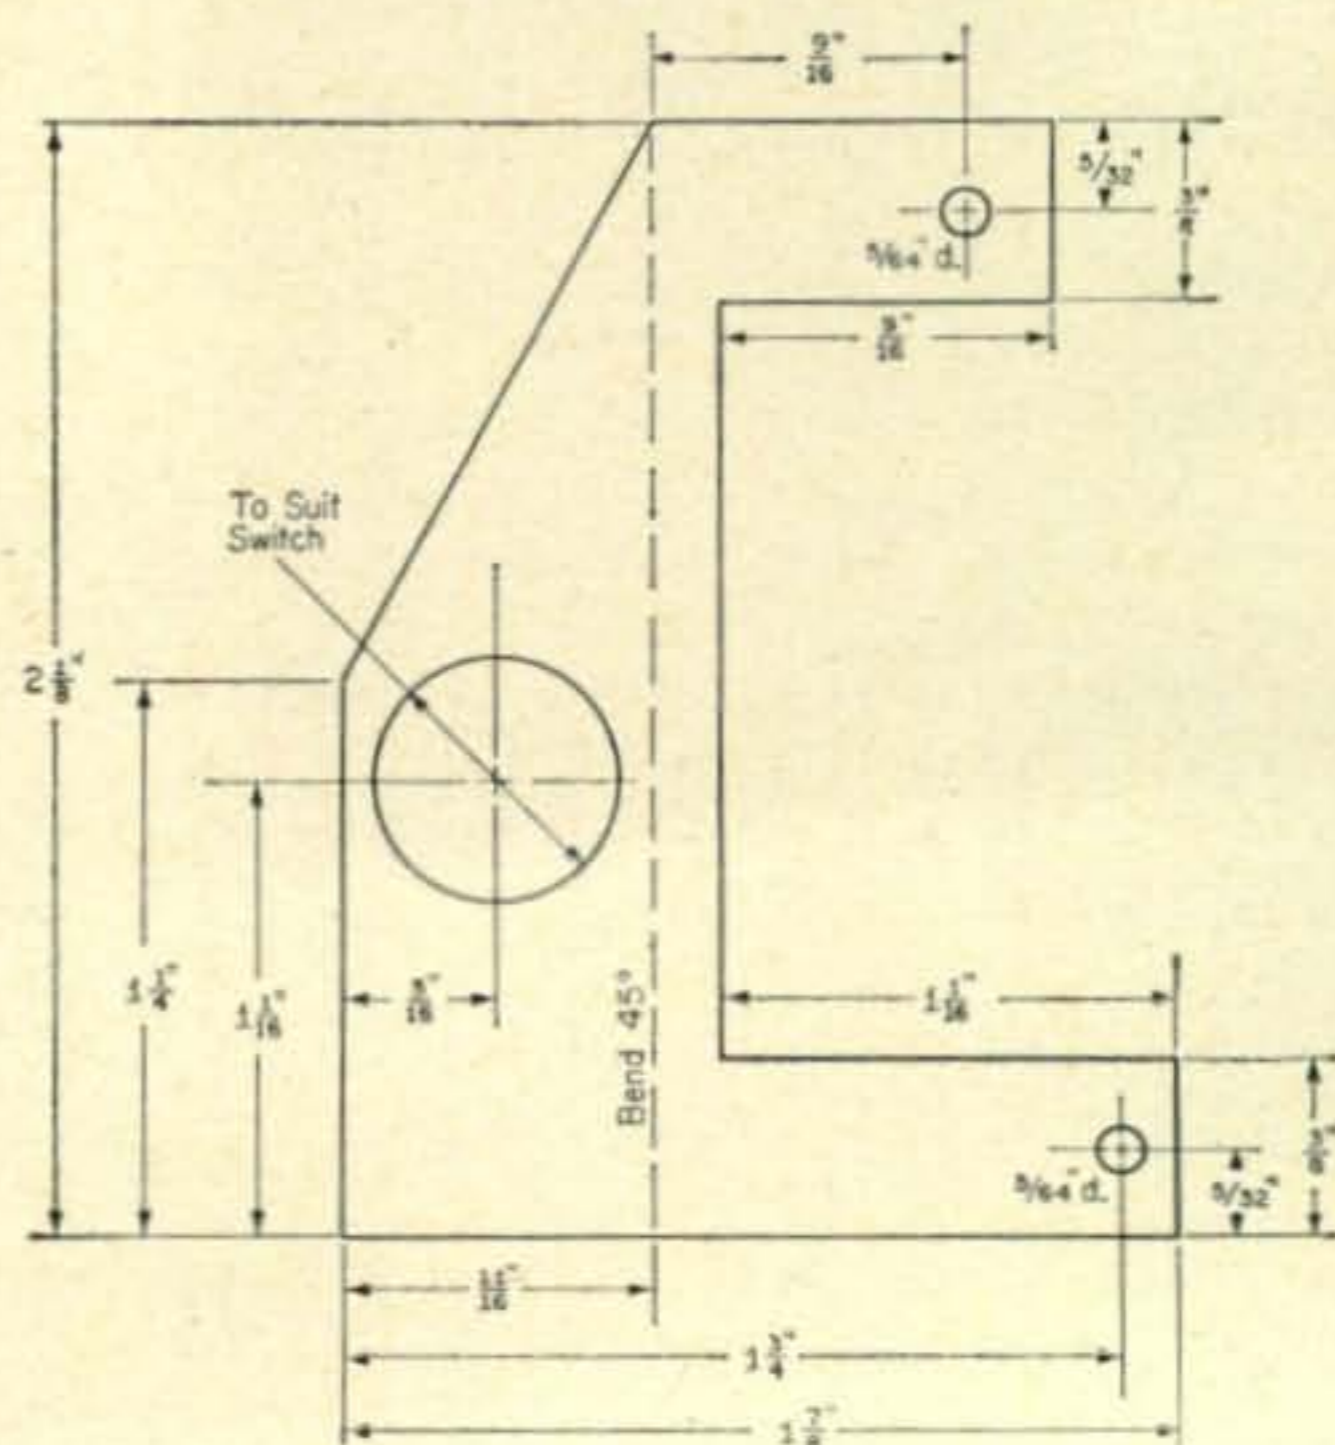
Mounting bracket for the three position toggle switch to be mounted on the crystal socket of the Ranger. The left-hand section should be bent up.
